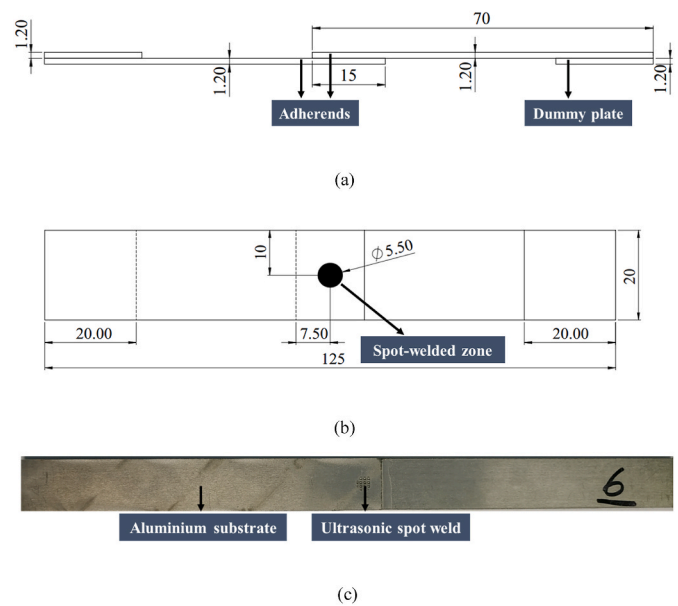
a) Lateral view of the spot-welded, bonded and hybrid joints, b) top view of the spot-welded and hybrid joints, and c) top view of a typical hybrid joint (dimensions in mm, also the thickness of the adhesive layer for both bonded and hybrid joints is 0.05 mm) [32].
